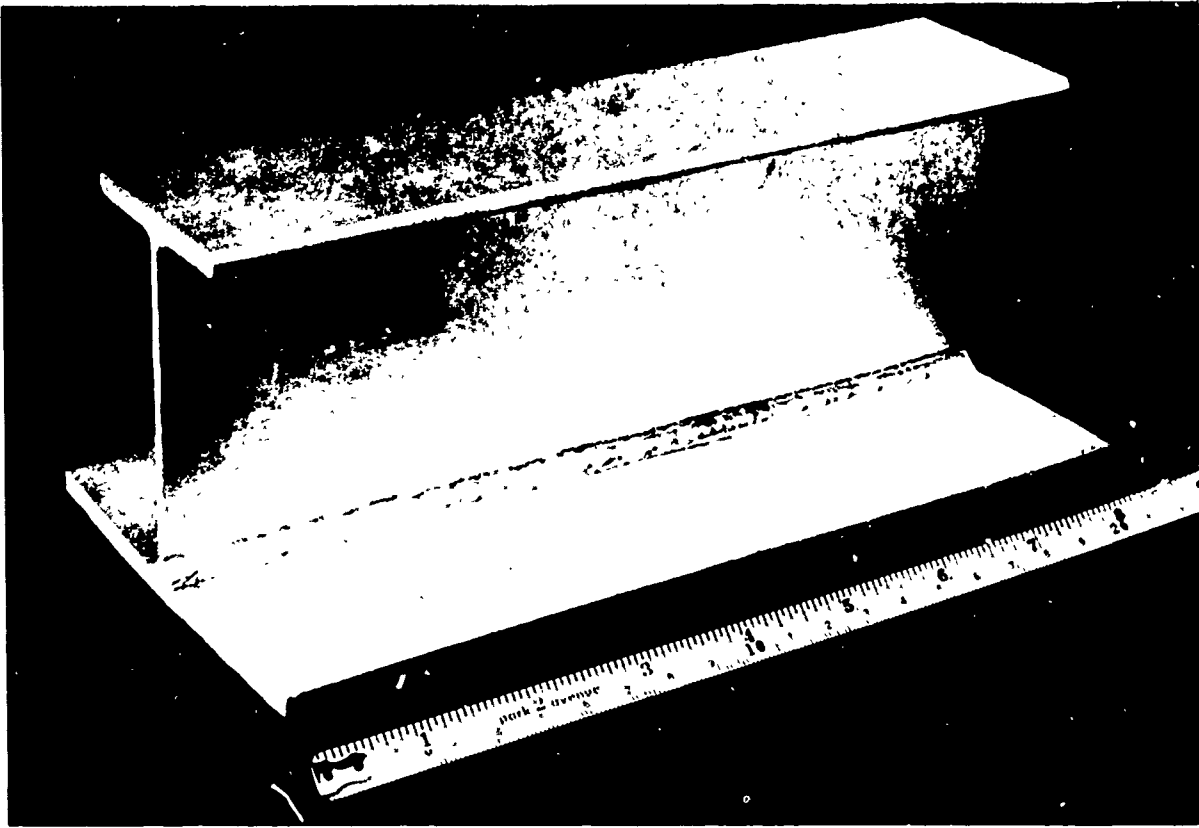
FILLET WELD SHOWING 5456-H111 "T" EXTRUSION
